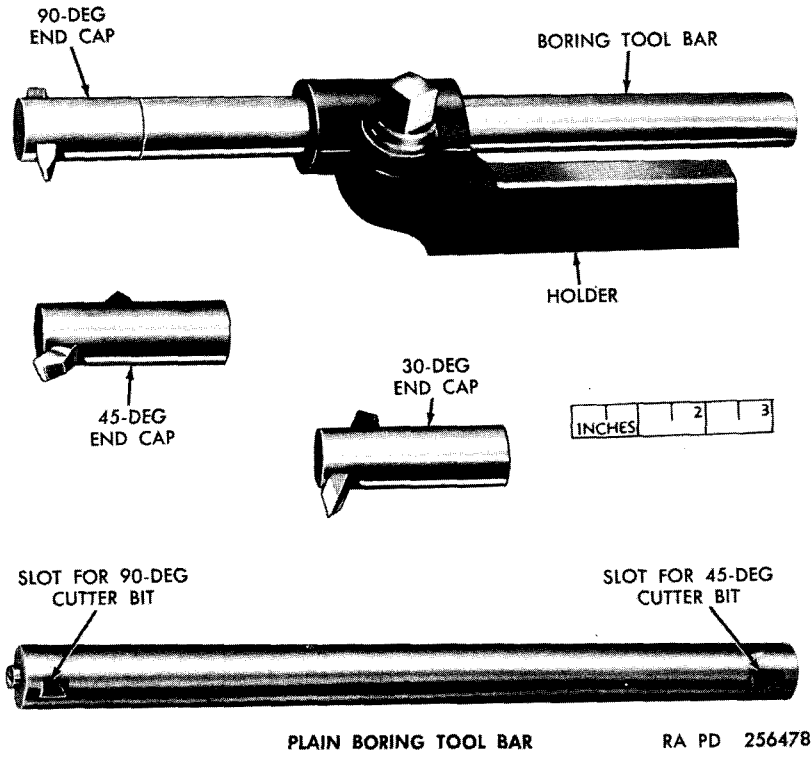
Boring bar cutting tool holder with end caps and cutter bits.
